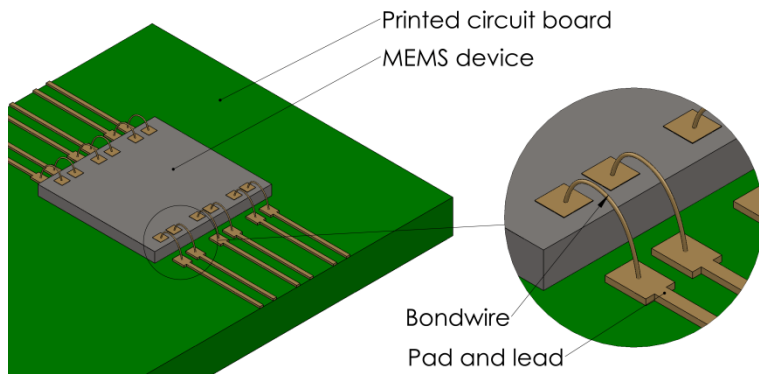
Wire bonding of the MEMS device to the PCB. Drawing: Per Dalsjø.
